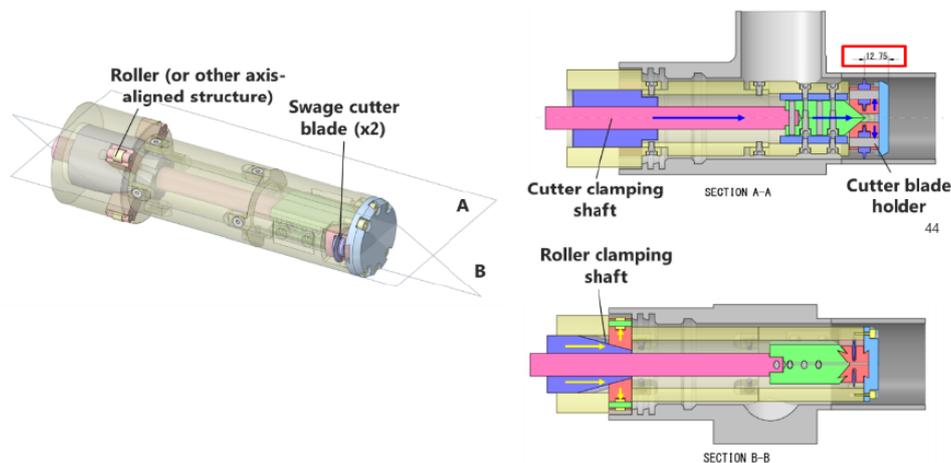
Proposal for FW pipe cutting that should be adopted for MC cutting
